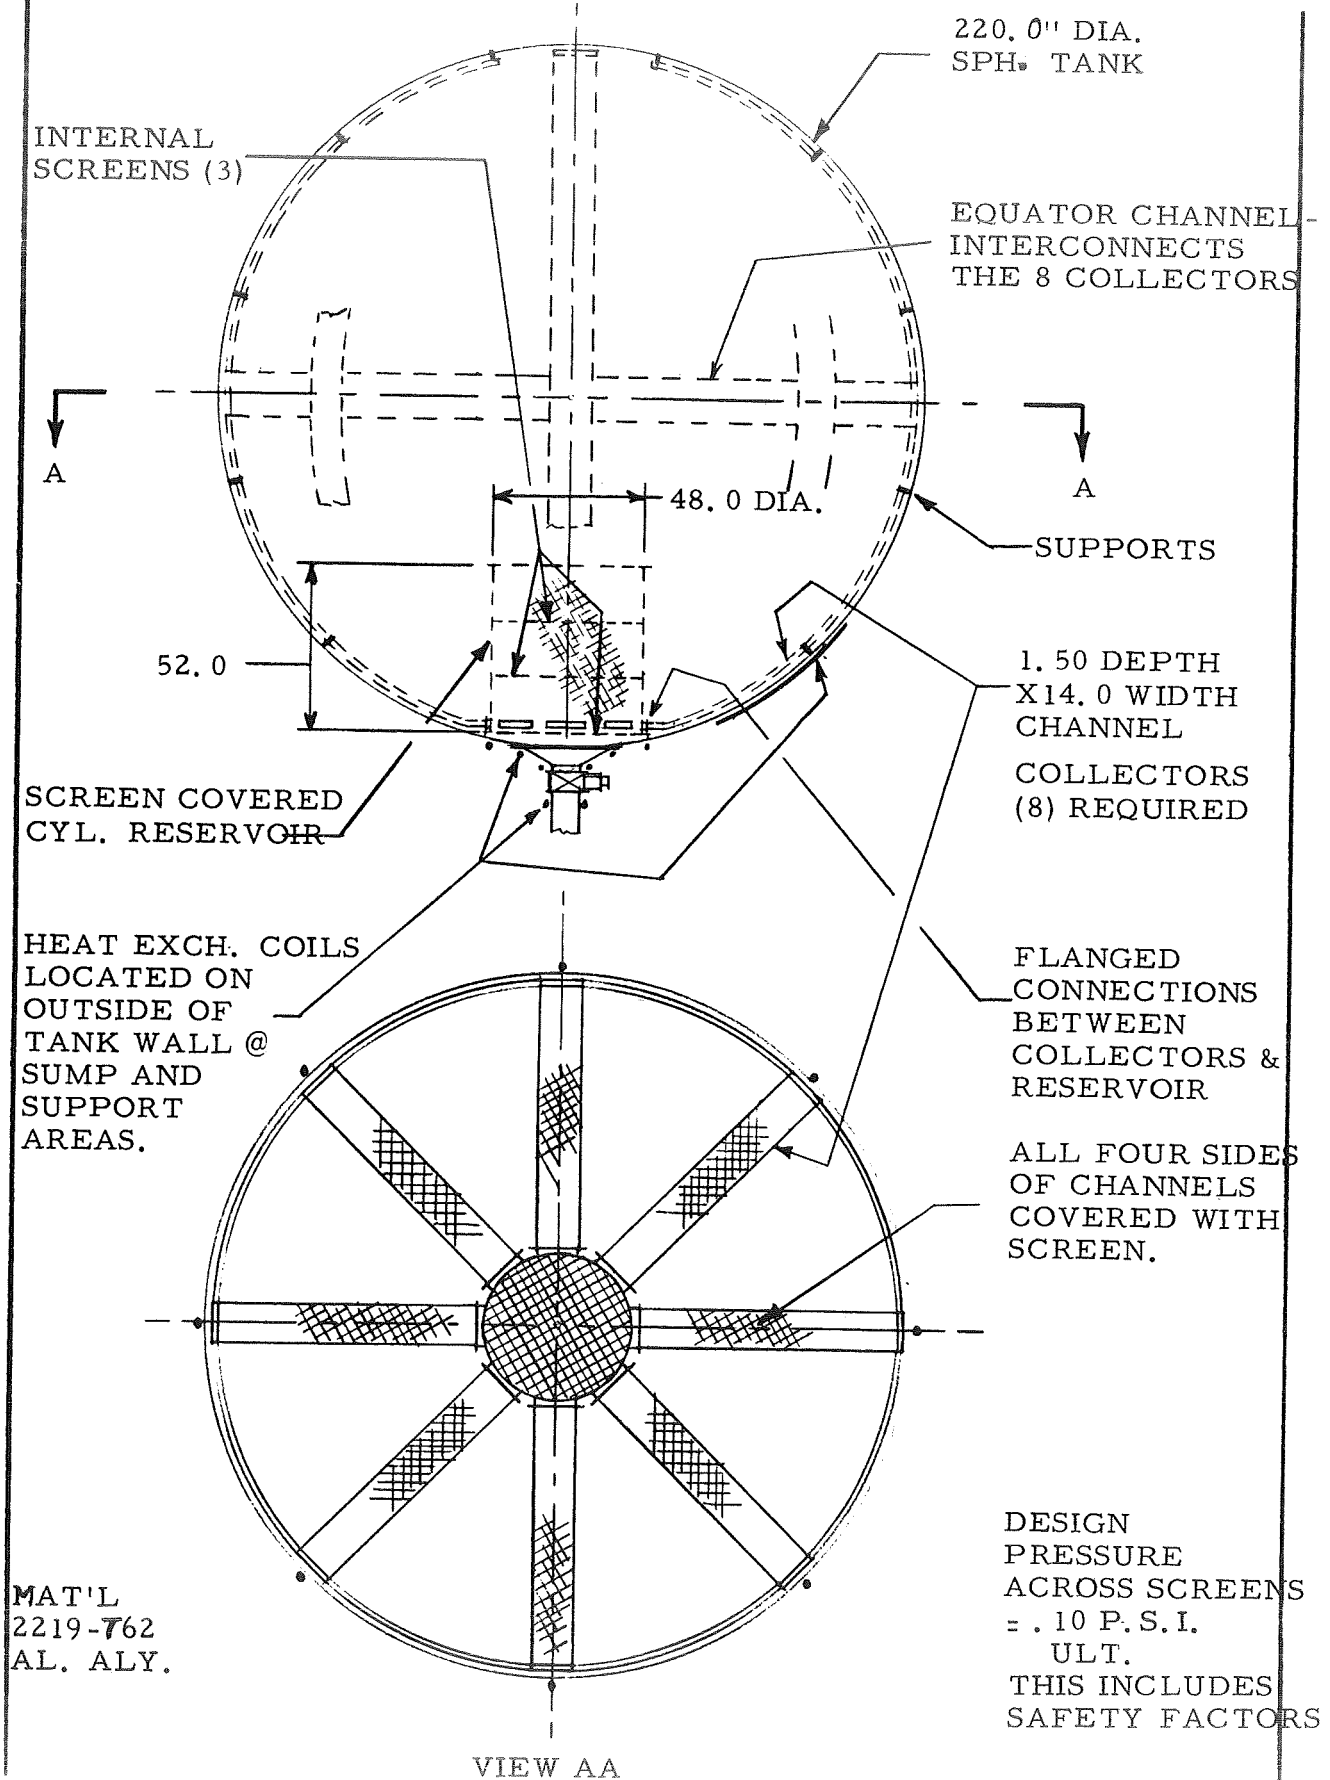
Oxidizer Tanker General Arrangement and Design Ground Rules.
